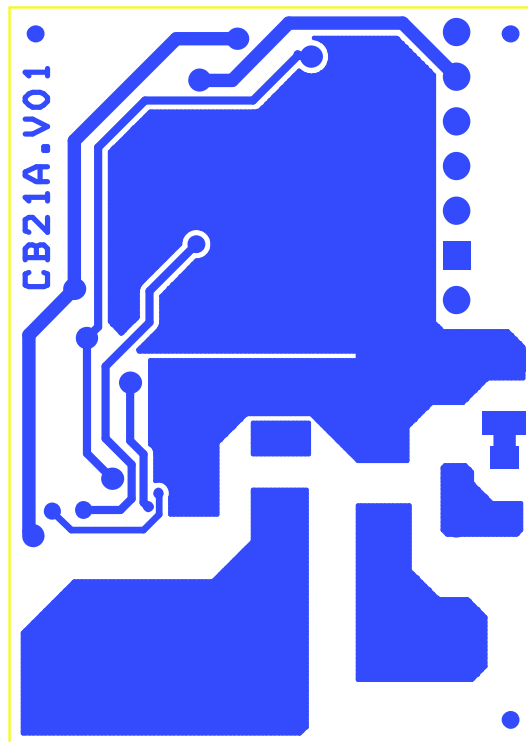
EVLMG1-250WLLC motherboard PCB layout – bottom side
